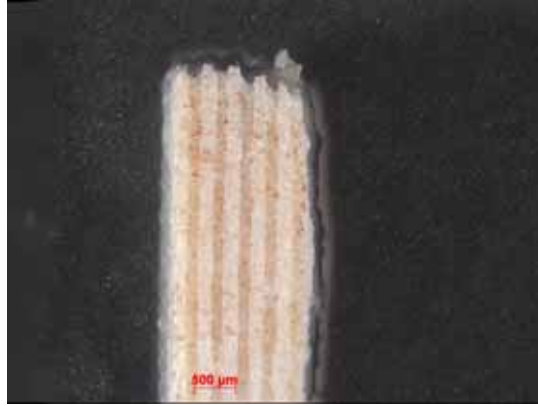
Fracture surface of the N610/Al₂O₃-LaPO₄ specimen with 10ply 0°/90° uni-tape lay-up subjected tension to failure in laboratory air at 1100 °C.
